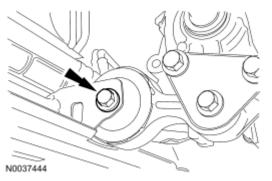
Locating Engine Roll Restrictor Bolt Courtesy of FORD MOTOR CO.
